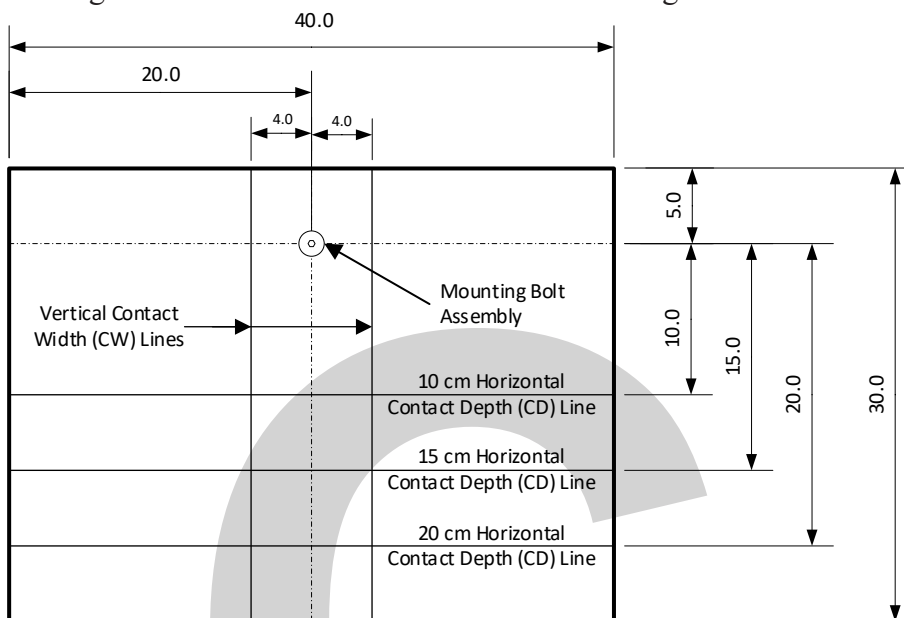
Testing Wall (not to scale, dimensions in cm)
